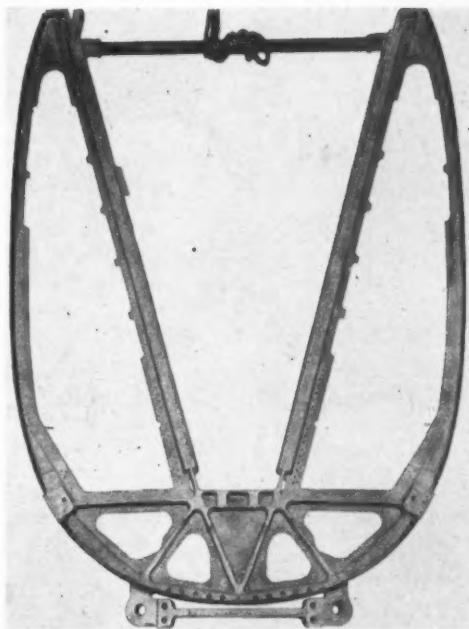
Fuselage Main Bulkhead Fabricated from Three Basic Parts, Each of Which is a Welded Steel Structure
